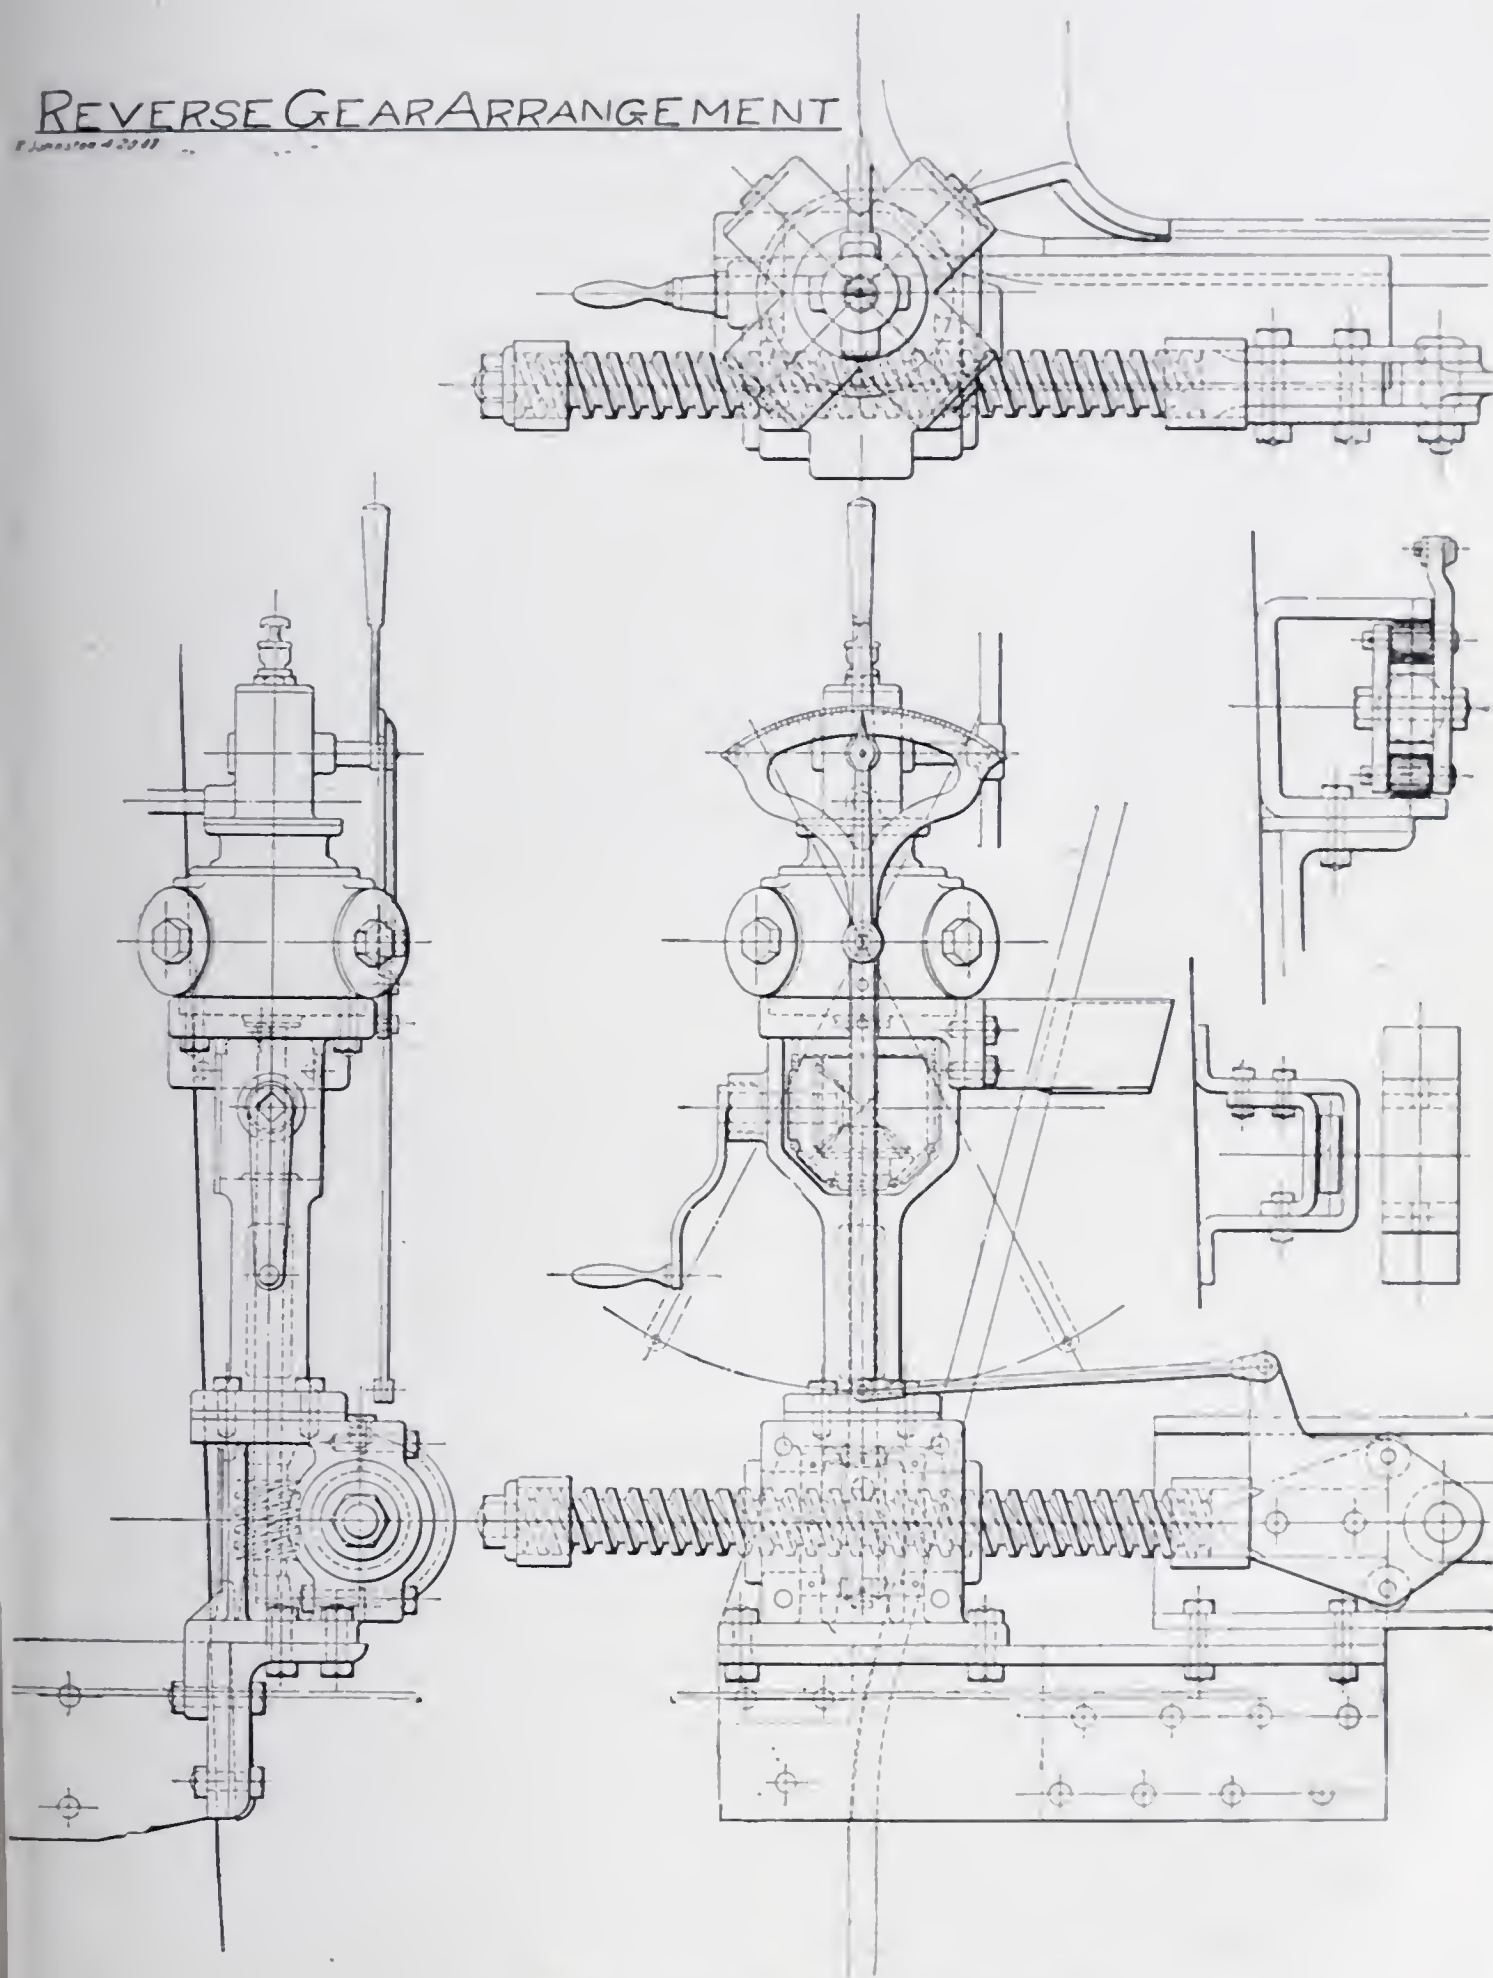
McCARROLL AIR REVERSING GEAR.
